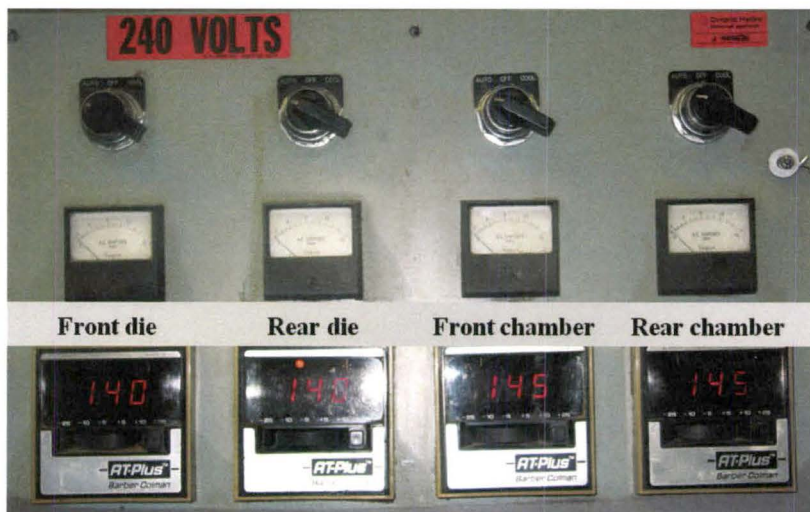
The controller for heating of chambers and dies in ram extrusion machine.
